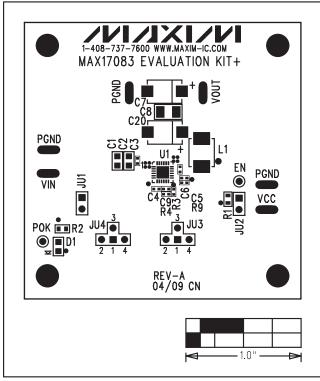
MAX17083 EV Kit Component Placement Guide— Component Side
